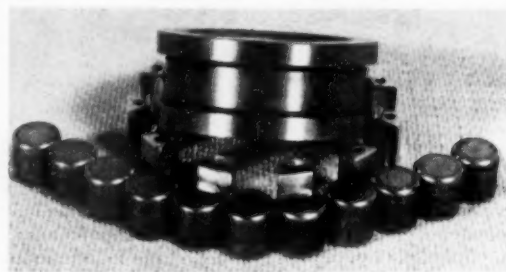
HUP PLANET-BEARING FAILURE
